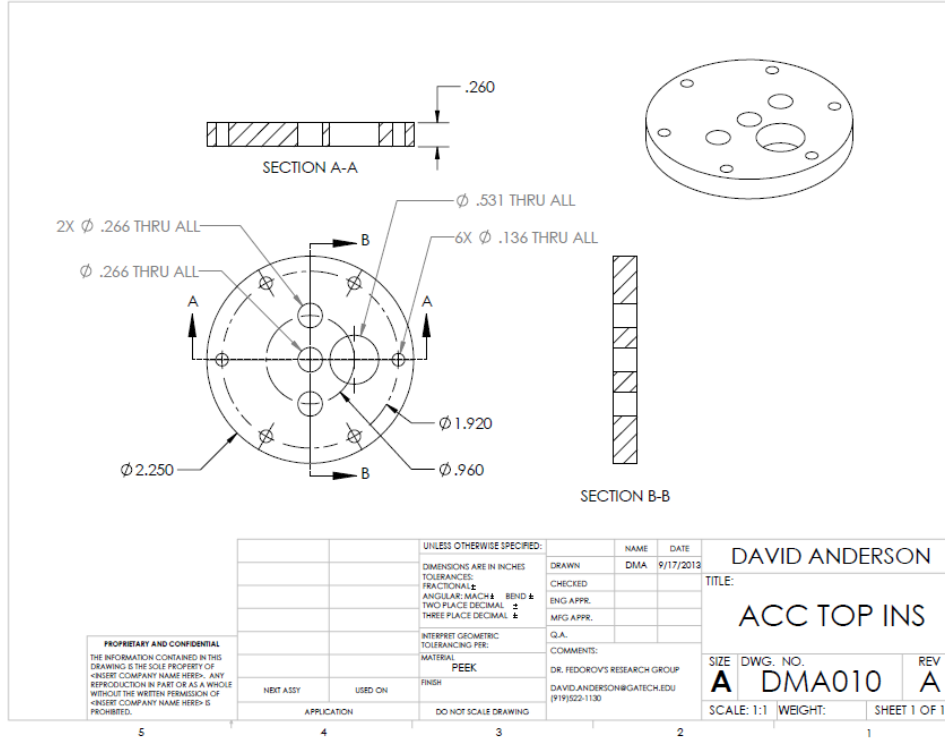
Fuel Accumulator Top Insulation Part Drawing
